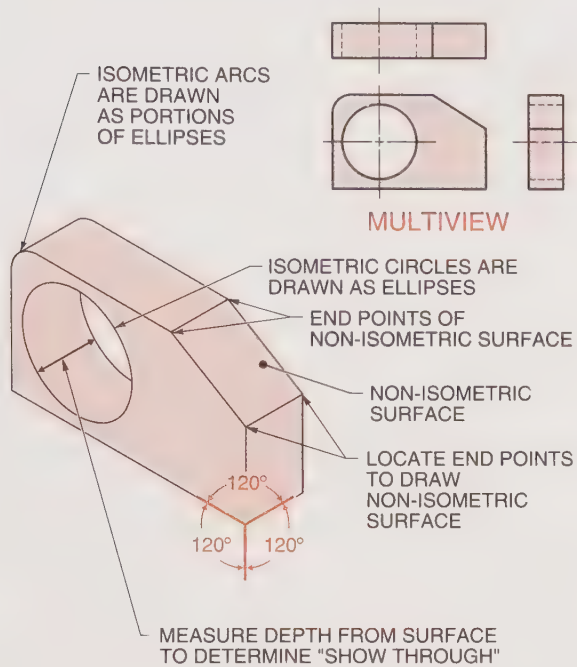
Isometrics contain three equal axes drawn 120° apart.
